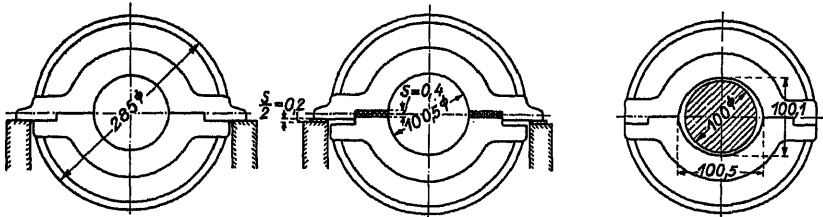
A.E.G., method of boring a turbine bearing bush
